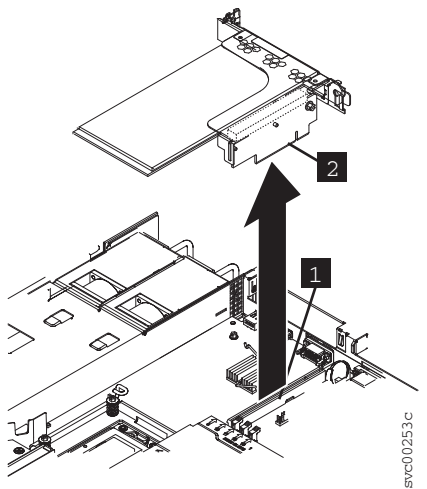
Removing the high-speed SAS riser-card assembly for the SAN Volume Controller 2145-CG8 or 2145-CF8
